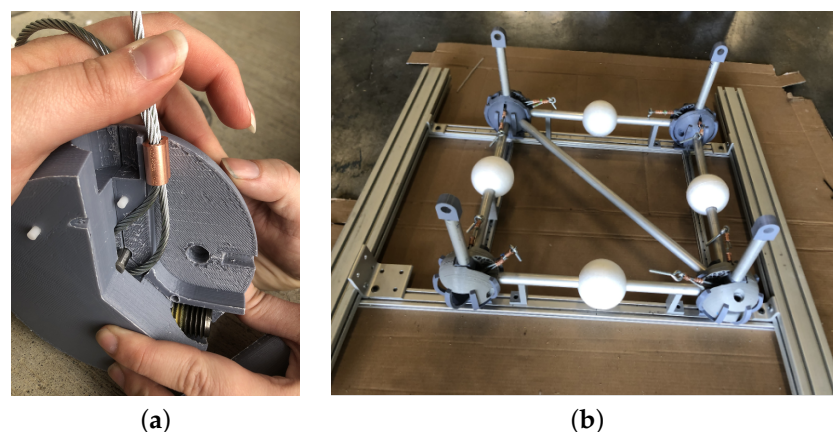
(a) Mid-assembly process of corner node. (b) Example module assembly jig for deployable truss plane.
